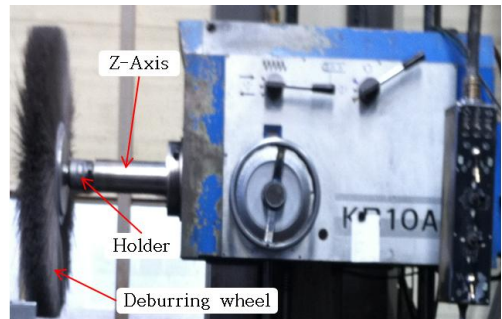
The assembly Status of the deburring wheel on the spindle in the machine
